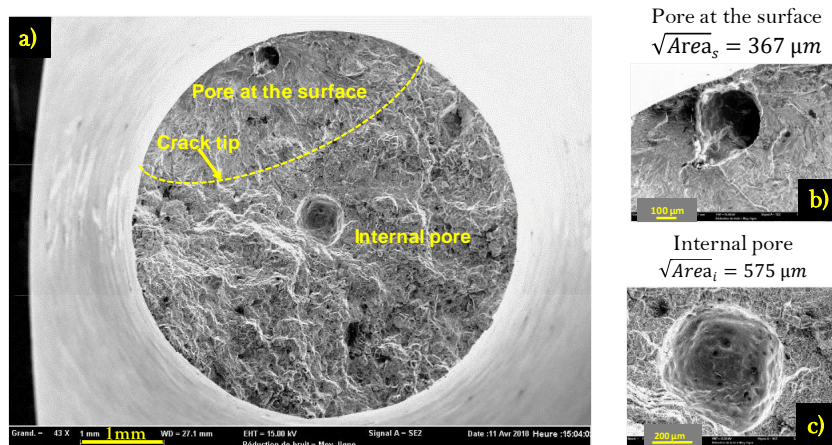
Fatigue failure, specimen BV1-05, Sa= 55 MPa, Nf=919402 cycles, (a) Macroscopic view, detailed view of (b) surface pore and (c) internal pore.
